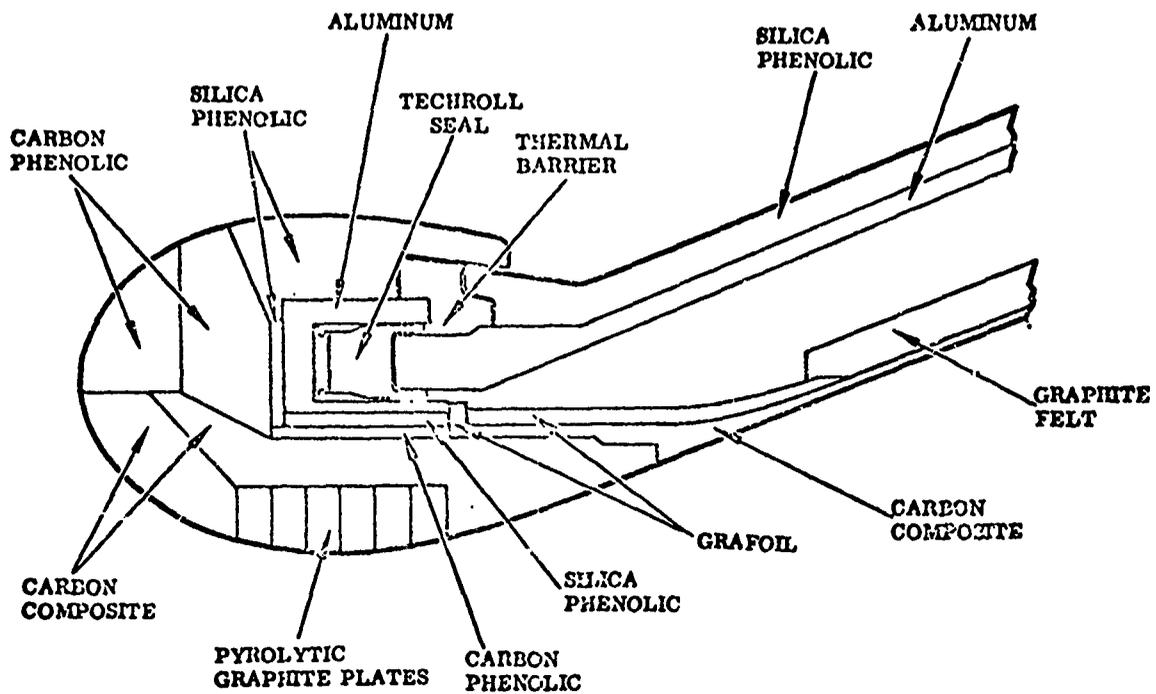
Final C4 Nozzle Design Schematic (Ref. 11)
